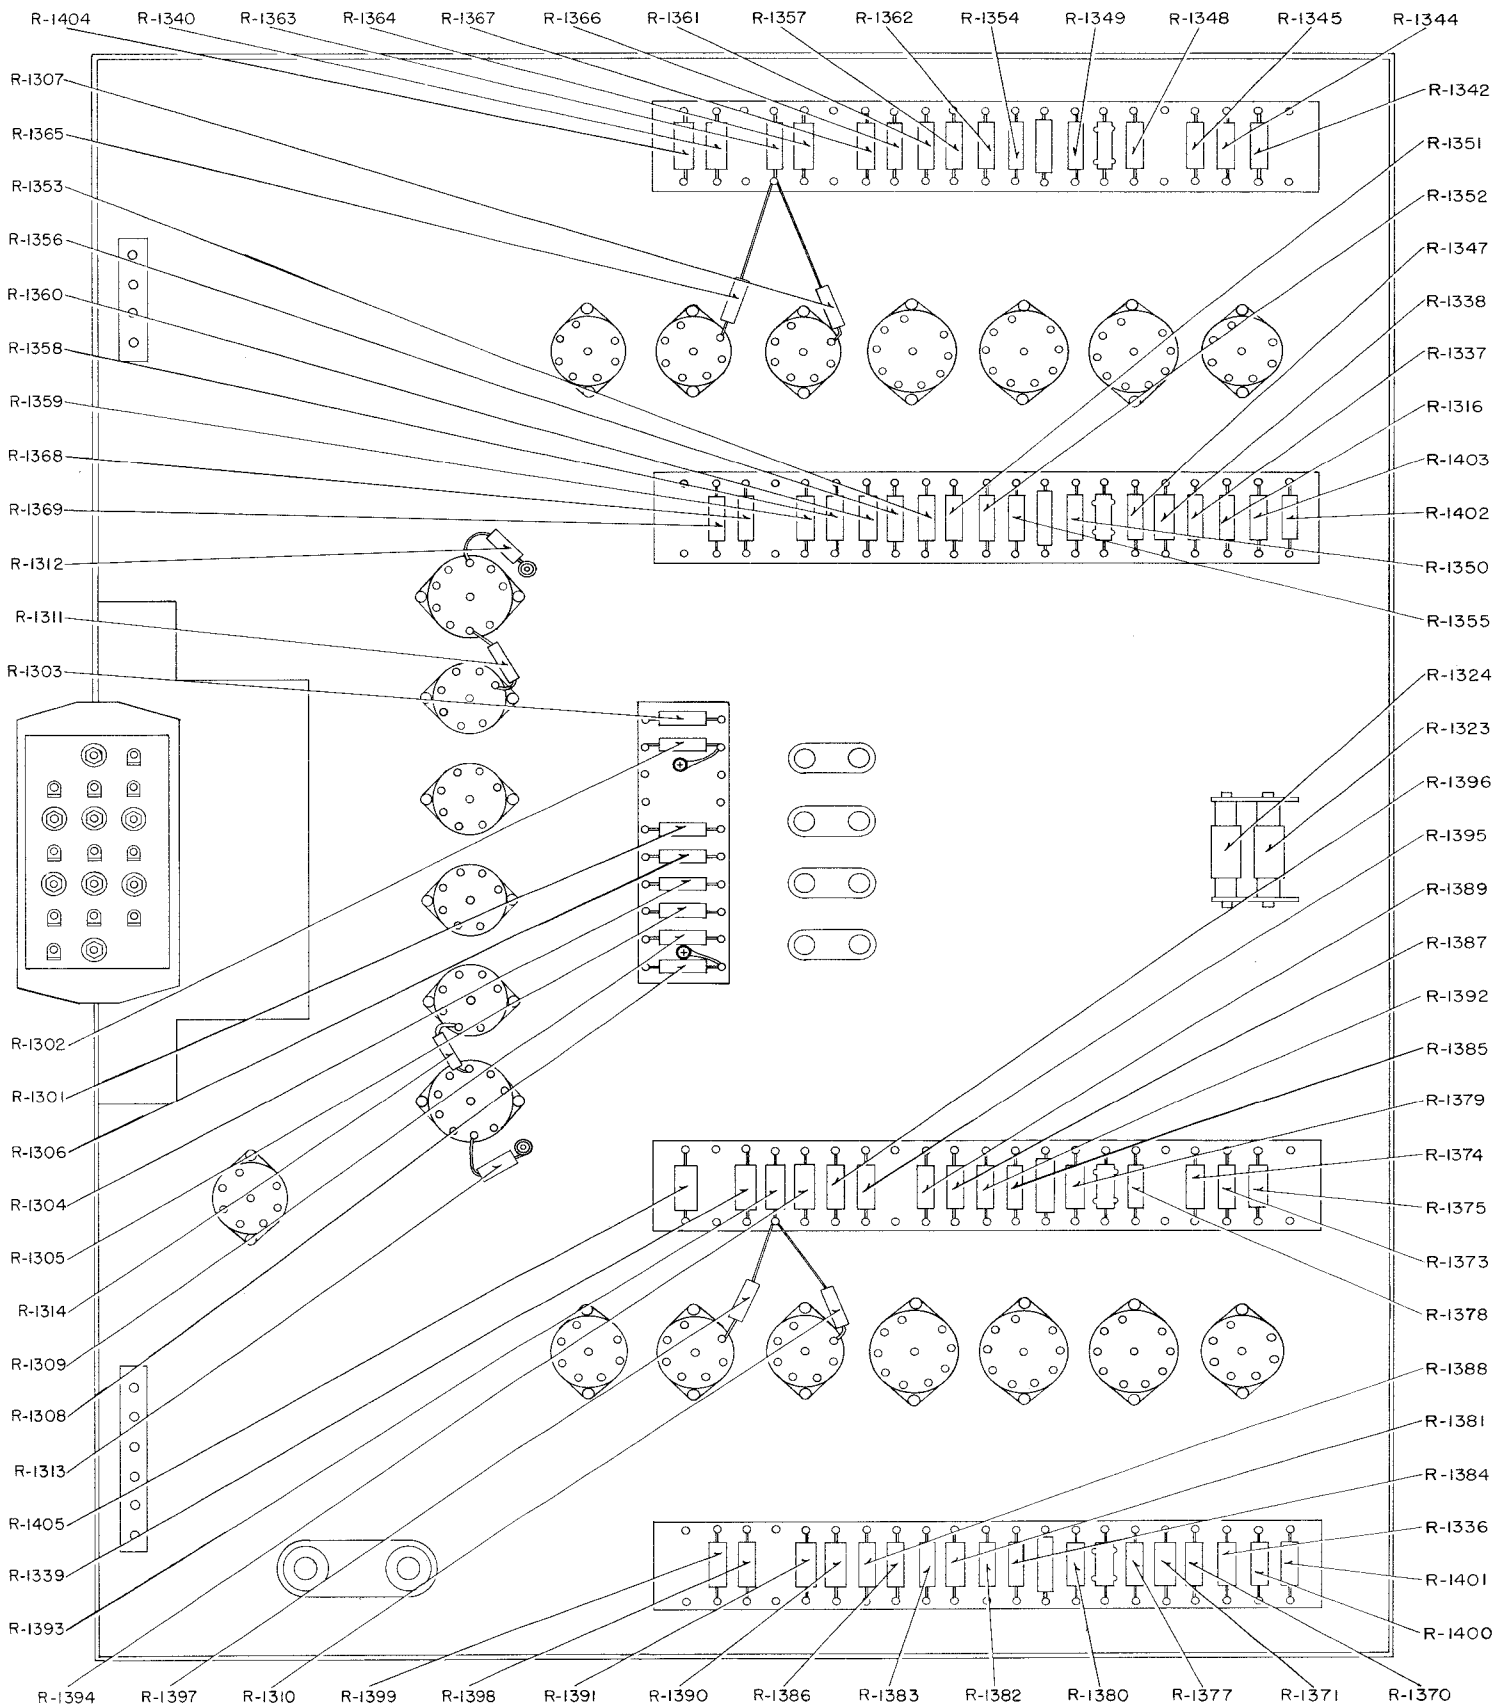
Resistor Locations Bottom of Chassis, Comparator Keyer CM-32/FRR-24
